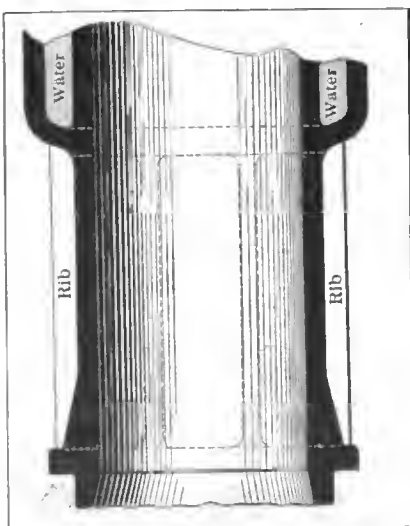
Section, indicating thickening walls at flange, and ribs disposed around girth
